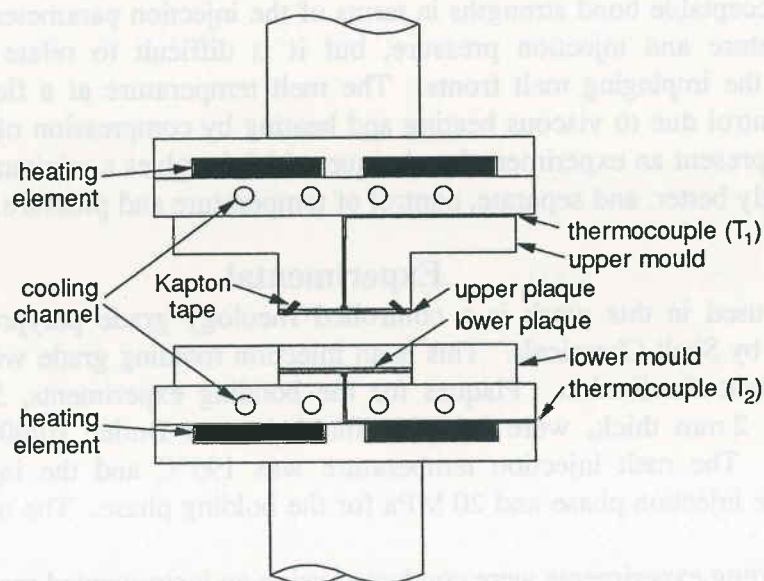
Schematic of the instrumented matched mold showing the heating elements, cooling channels, position of sample plaques and the method of attachment of the upper plaque to the upper mold.
